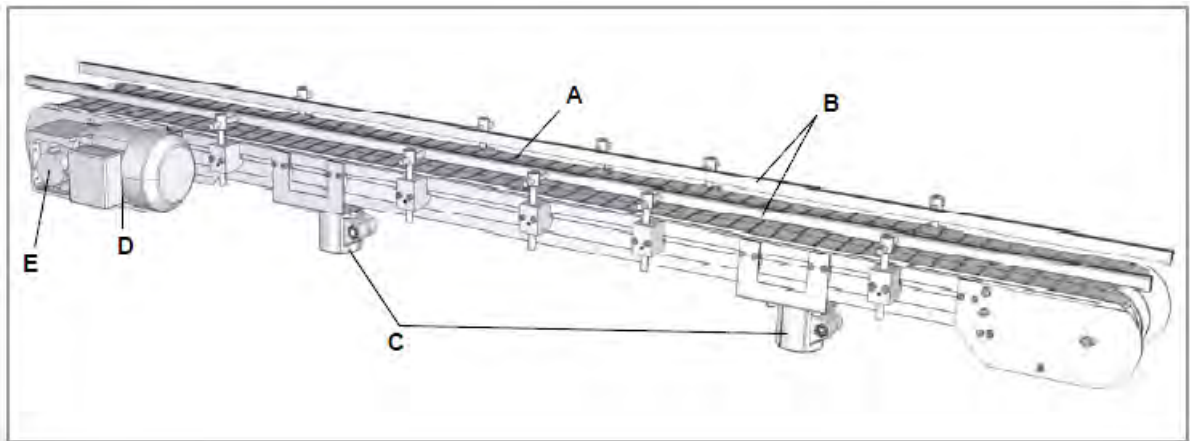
Functional elements of the CB conveyor (A = Conveyor belt, B = Lateral guide rails, C = Mounting clamps for fixing the belt, D = Drive motor, E = Belt drive).
